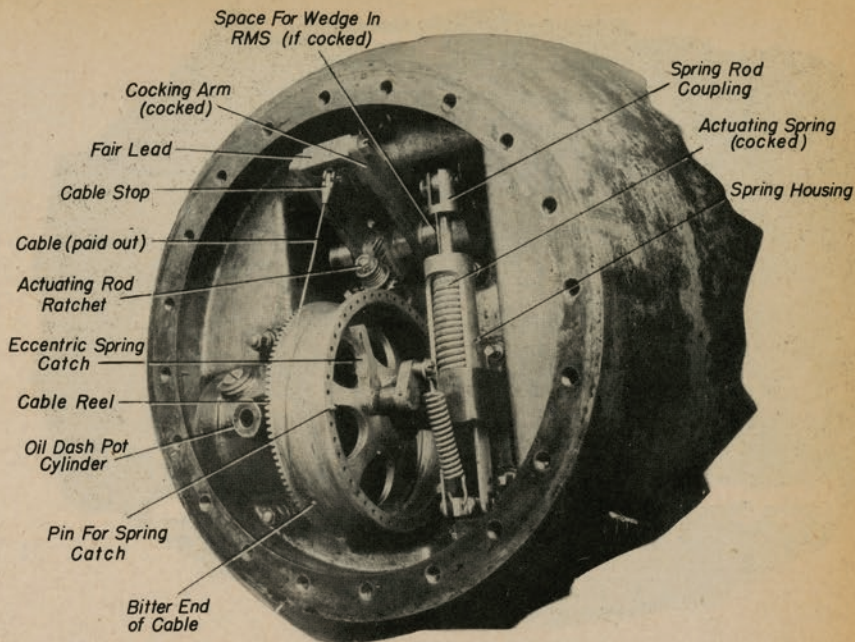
Type 3 Warhead (Nose) - Mechanism Cocked
